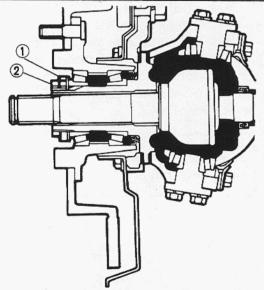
1 Wheel Bearing Nut 2 Wheel Bearing Lock Nut
